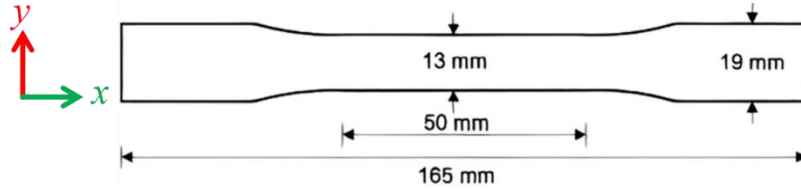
Dog-bone tensile specimens manufactured according to the ASTM D638-14 standard.
